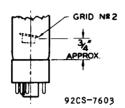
Location of Grid No. 2 in Tube Neck.
